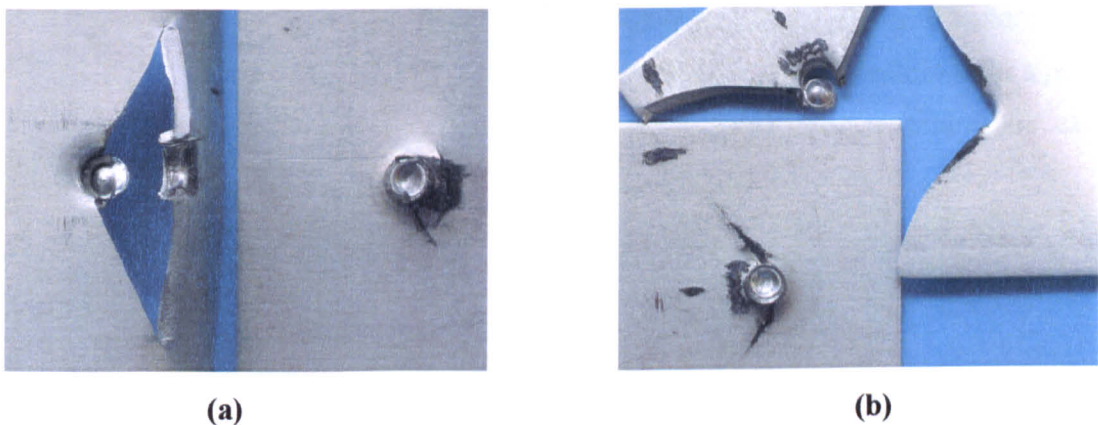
Failure modes occurred during fatigue testing, (a) rivet fracture in a FSP53 fastening that failed at 4.5kN after 224,770 cycles, (b) sheet material failure in a FSP510 fastening that failure at 4.5kN after 321,210 cycles
